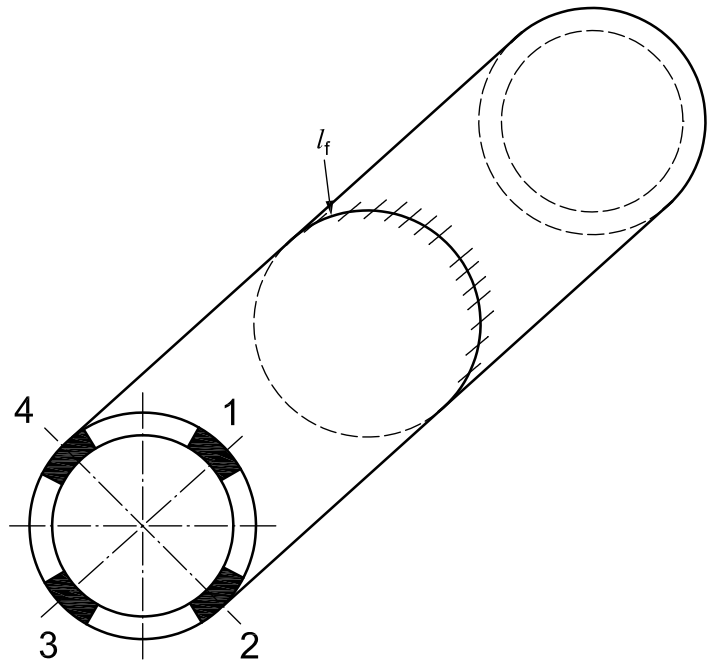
Examination length and locations for fracture or bend test specimens for a butt weld in pipe
